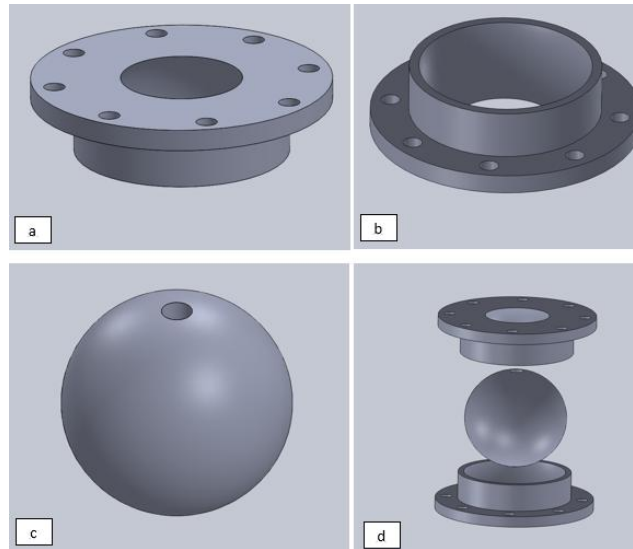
Probe traverse mechanism (a) top flange (b) bottom flange (c) rotating sphere and (d) assembly of the traverse mechanism
